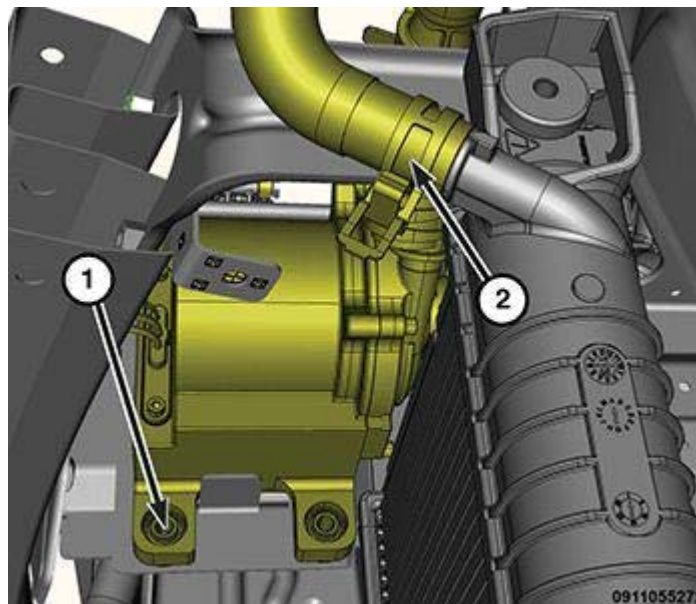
Lower Coolant Pump Mounting Nuts & Clamp
